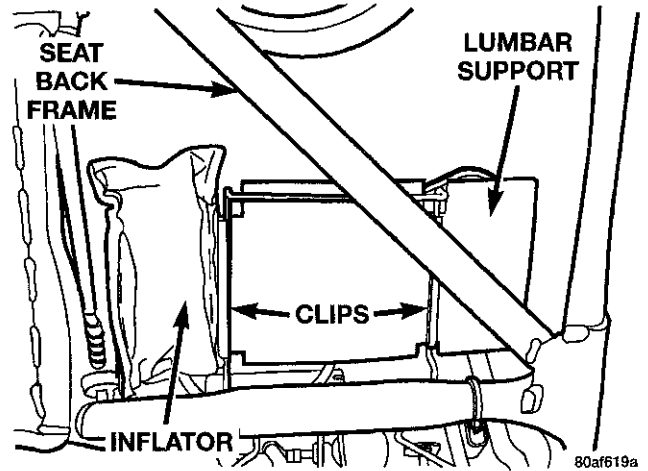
Power Lumbar Adjuster and Motor Remove/Install
